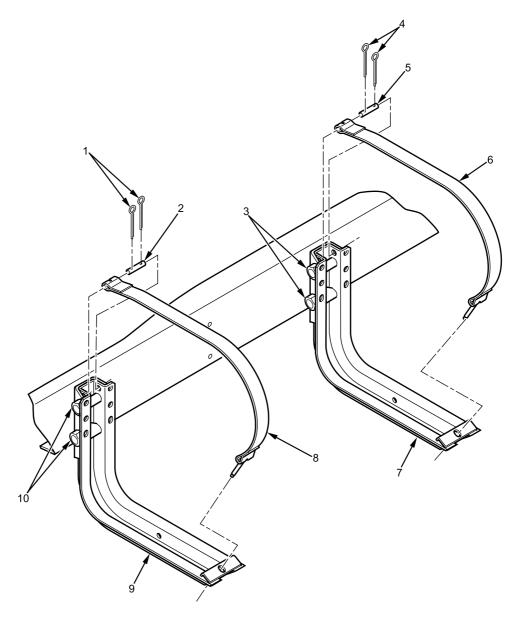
Fuel Tank Mounting Strap Cotter Pins.
